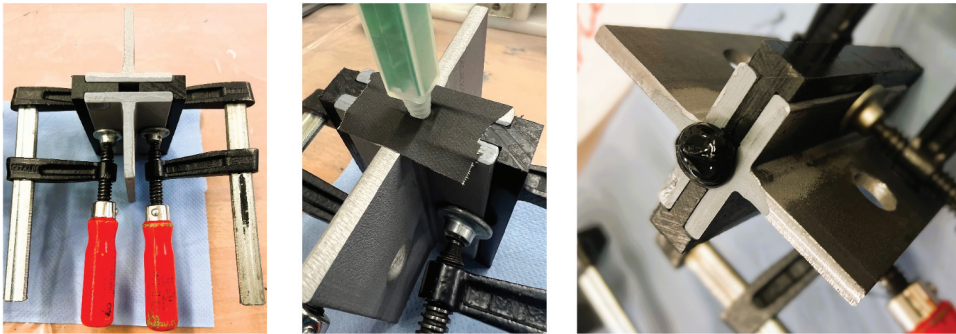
Left: Positioning of the T-profile sections using polyethylene moulded parts and fixing with two screw clamps; centre: Adhesive bonding by applying the adhesive at an angle of 45° to the upper end face of the joining gap; Right: formation of an adhesive bulge at both ends of the joint after the end of the adhesive application.
